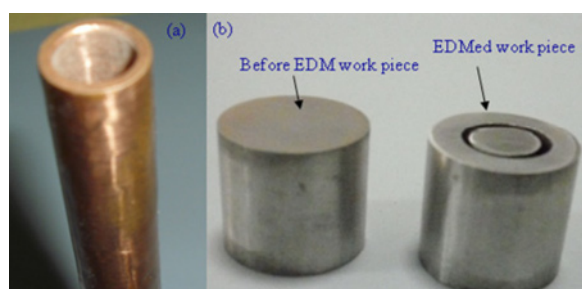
(a) Cu electrode, (b) Inconel 718 work piece
